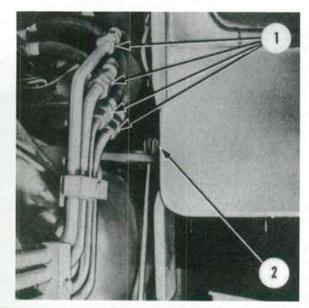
When removing cab, tag power steering hoses (1) to ensure correct reassembly. Remove pin (2) to disconnect clutch linkage.
